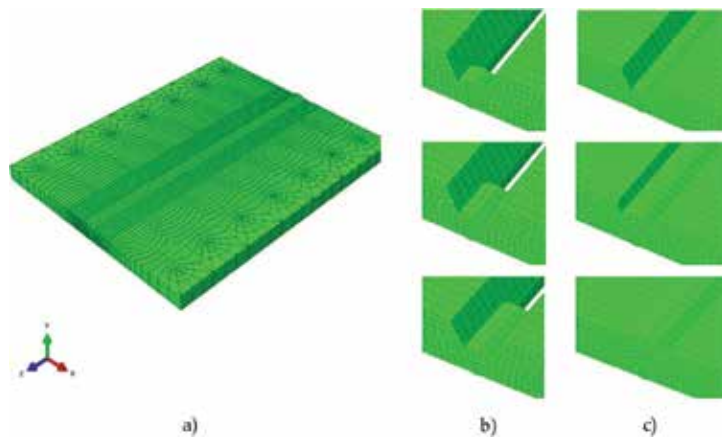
(a) Example of a full geometric model of a multipass butt weld, (b) principle of the addition the weld bead and (c) multipass welding modelling of a three-pass weld case.
